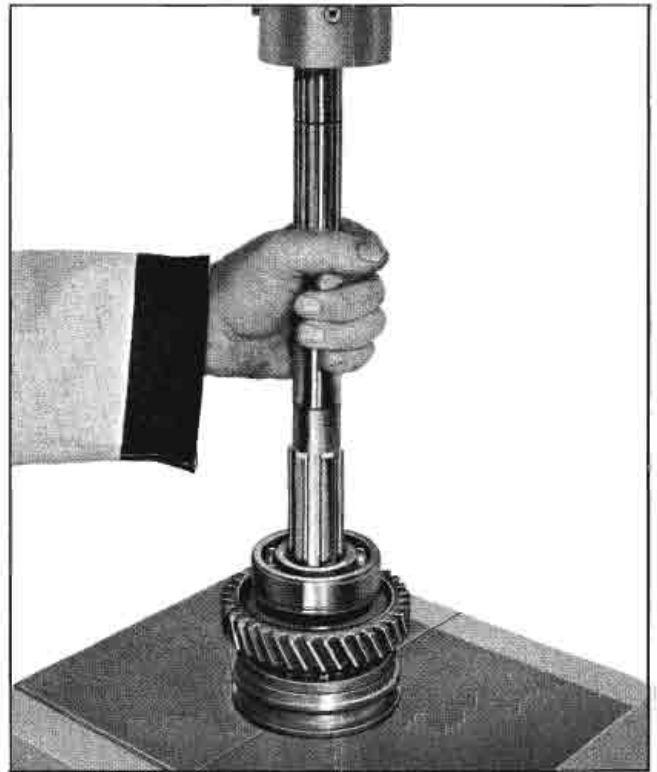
B-19 Removing Mainshaft from Rear Bearing and Clutch Assembly
